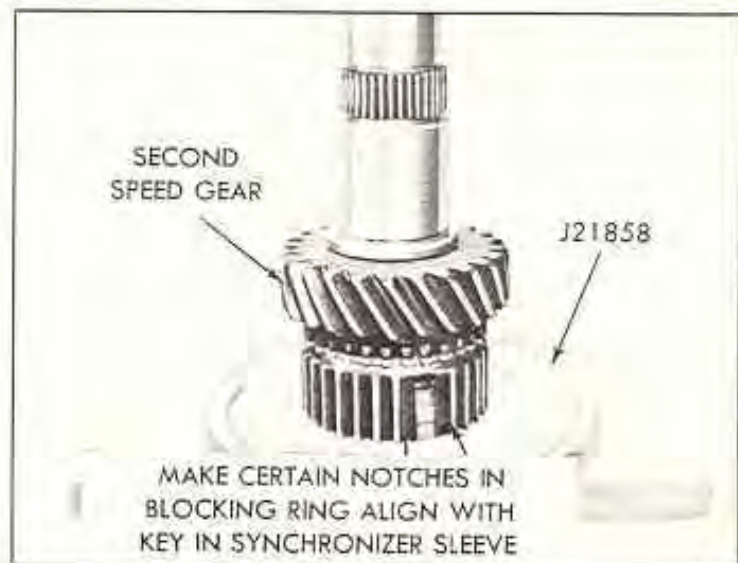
B-22 Installing Second - Third Speed Synchronizer and Gear
